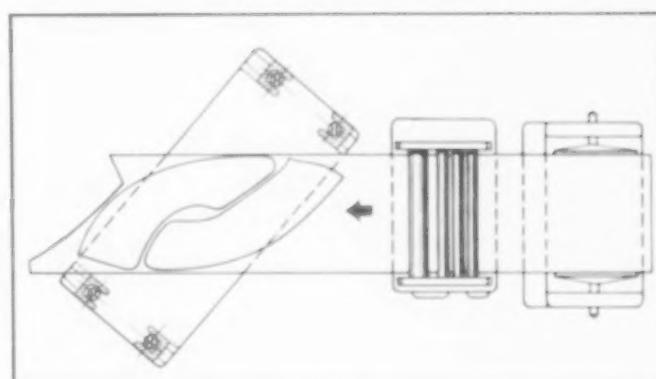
Plan view of feeding and straightening machine feeding material diagonally into a blanking press.
